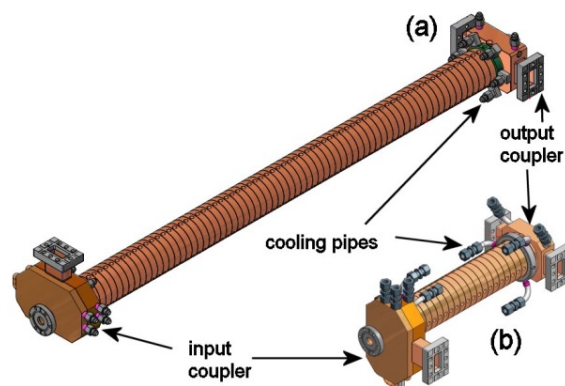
Mechanical drawing of the C-Band Structure (a) and prototype (b).
